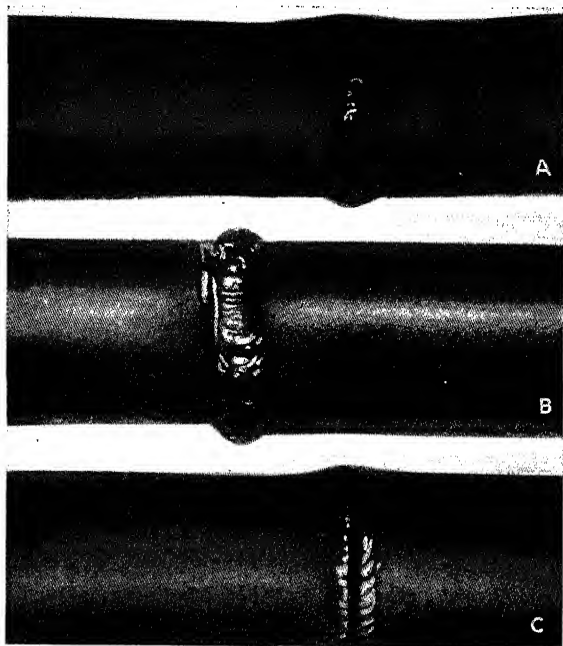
(a) Tension failure in oxyacetylene welded chrome-molybdenum steel tube. (b) Tension failure in arc welded chrome-molybdenum steel tube. (c) Fatigue failure in oxyacetylene flame welded chrome-molybdenum steel tube.
